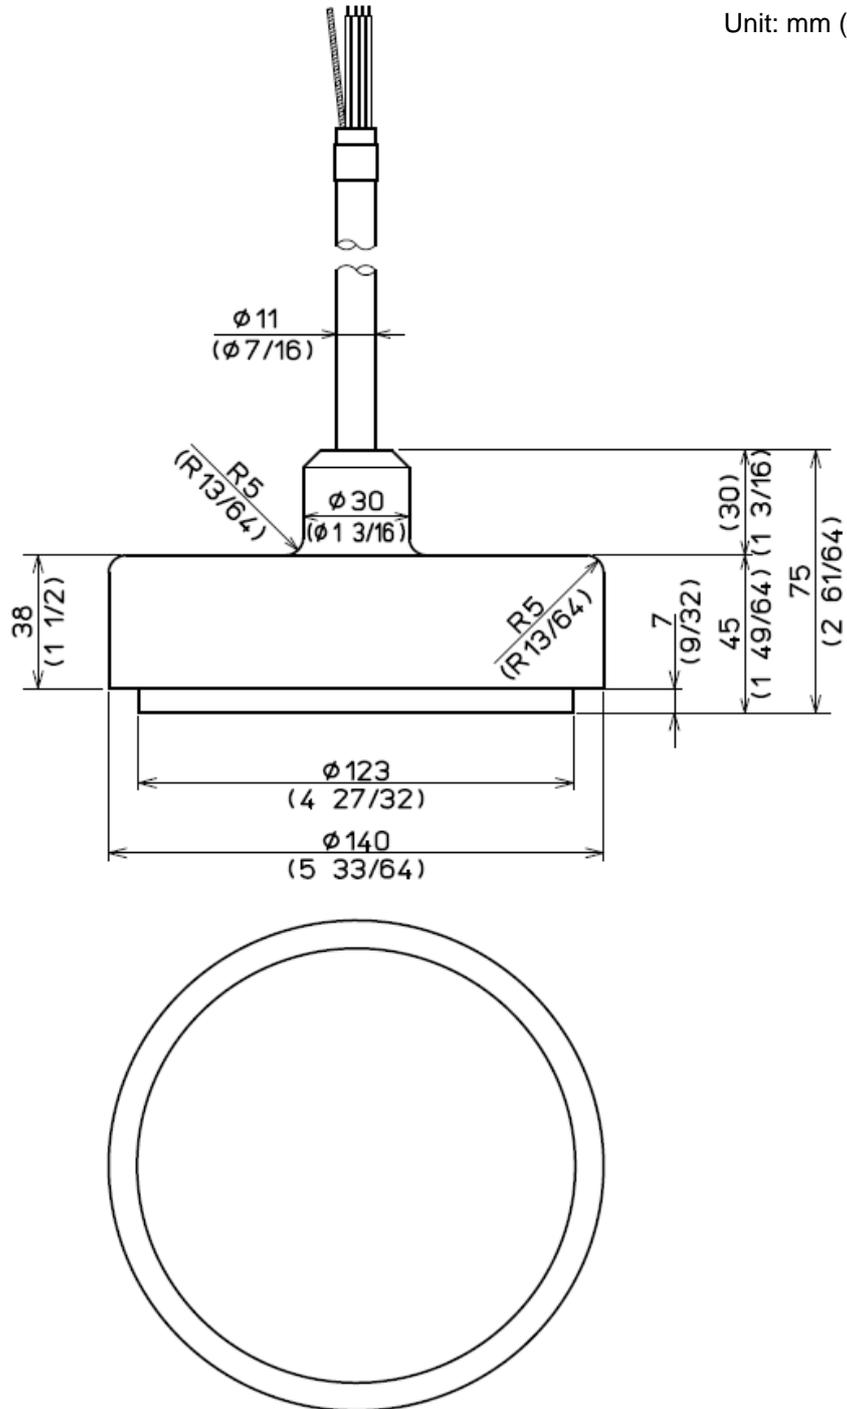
Outline dimensions of a transducer (TD-66)
